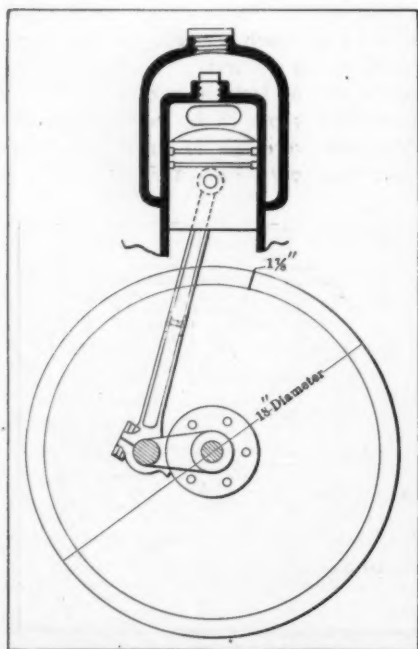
Method of calculating amount of advance from fly-wheel marks
